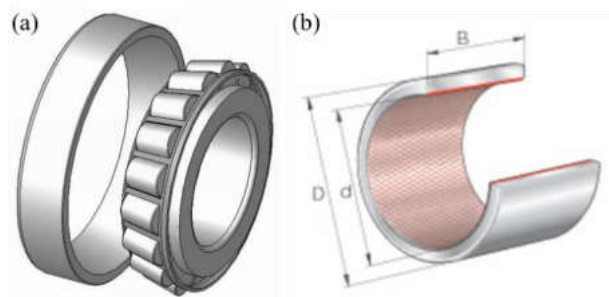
(a) Tapered roller bearing and (b) sliding contact bearing. [Extracted from ABF enterprise]
